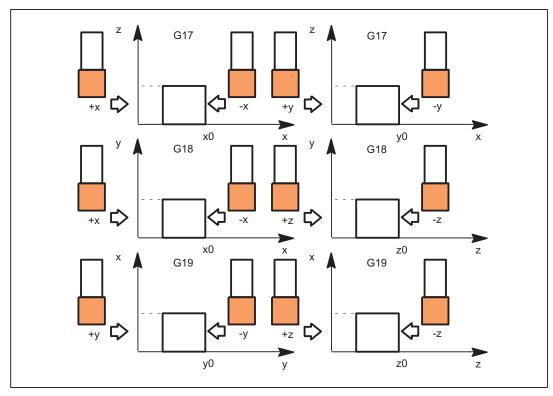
Tool diameter for selected planes G17, G18 and G19
